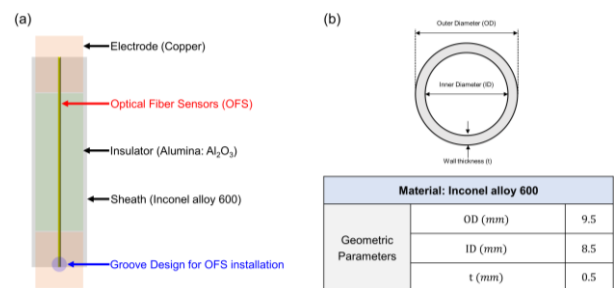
Heater rod configuration for optical fiber sensor (OFS) installation (a) directly heated heater rod assembly, (b) geometry of Inconel 600 sheath (OD: 9.5 mm, ID: 8.5 mm, t: 0.5 mm)
